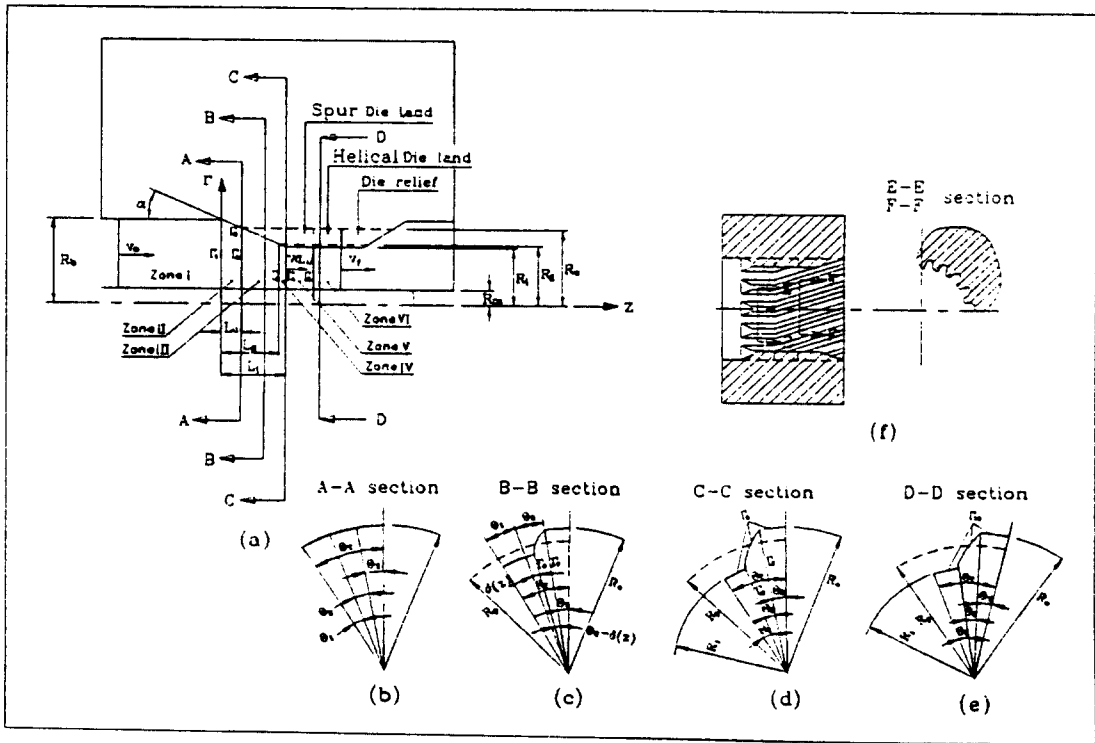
Geometry of gear extrusion die, (a) longitudinal, (b), (c), (d) and (e) cross-sectional and (f) detail views for tooth profile forming part of die
